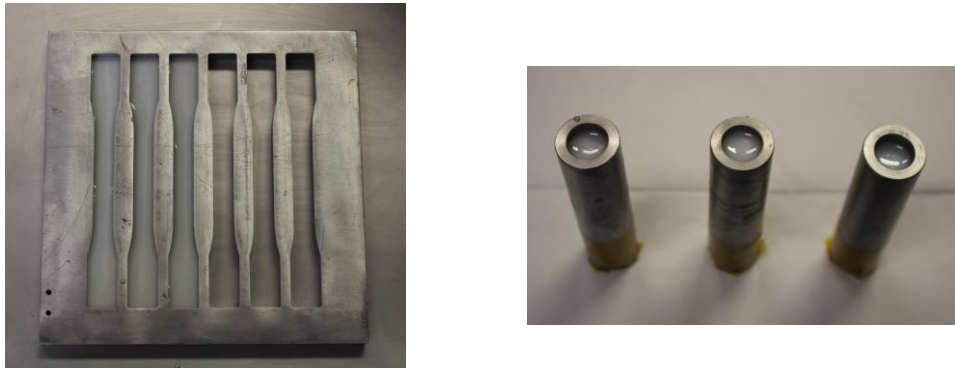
Specimens as-cast in mold for dogbone tension geometry (left) and right circular cylinder specimens for compression (right)
